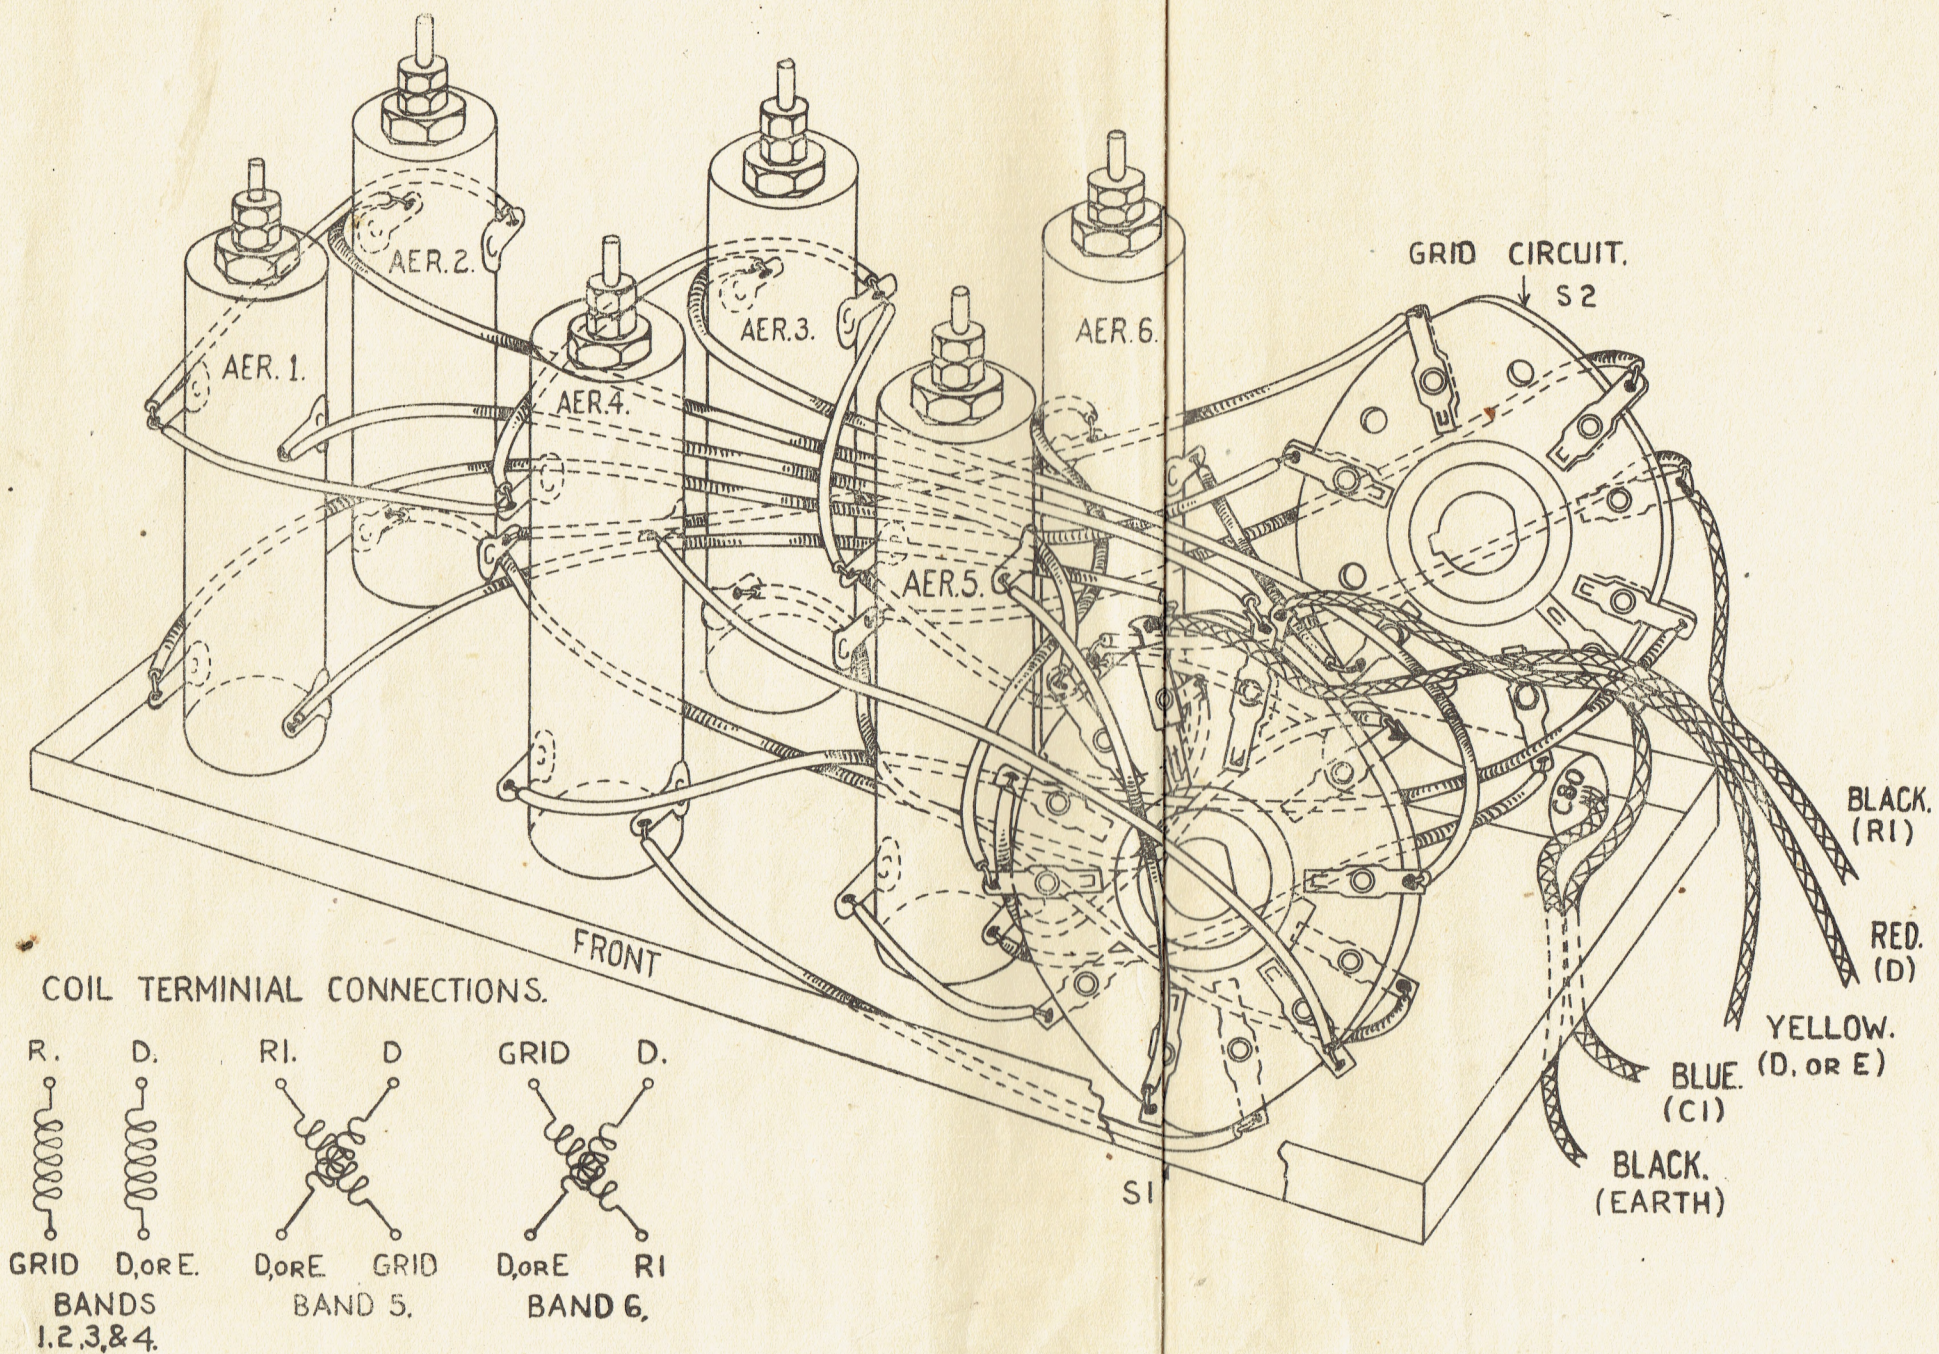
COIL ASSEMBLY. AERIAL SECTION.
